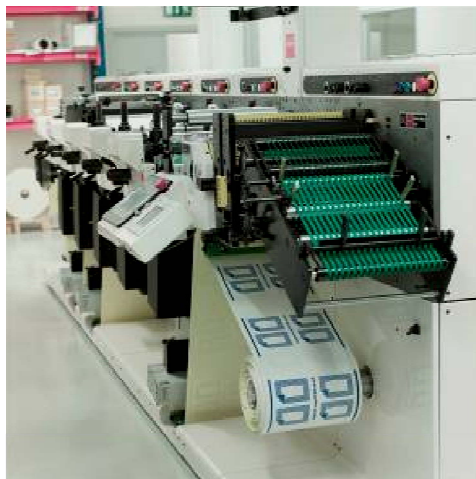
A roll-to-roll printing machine in Acreo's Printed Electronics Laboratory.
